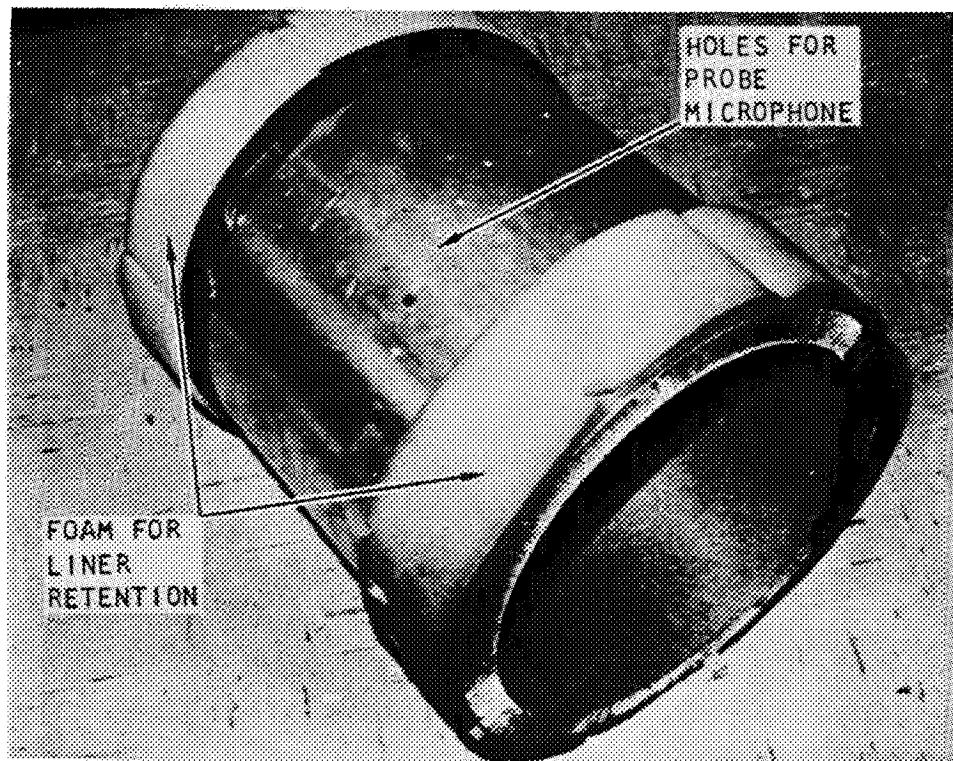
Welded Fibrous Metal Outer Liner Illustrating Holes for Probe Microphone
